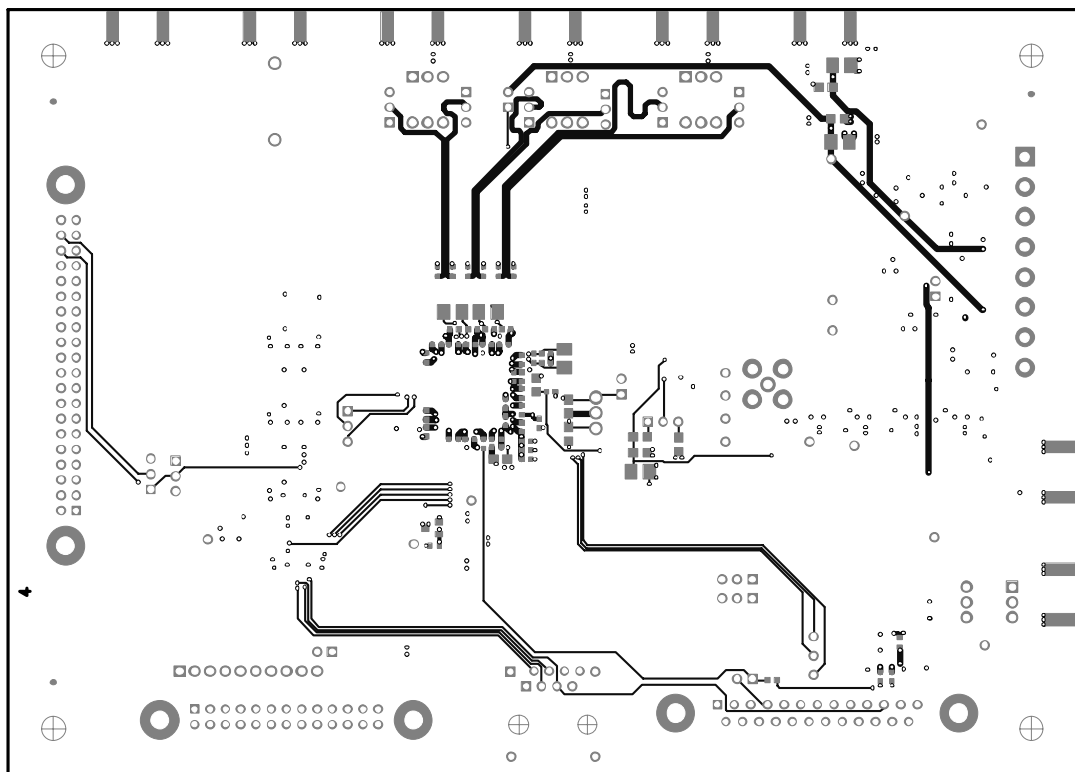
AD9878 Evaluation PCB—Bottom Assembly
